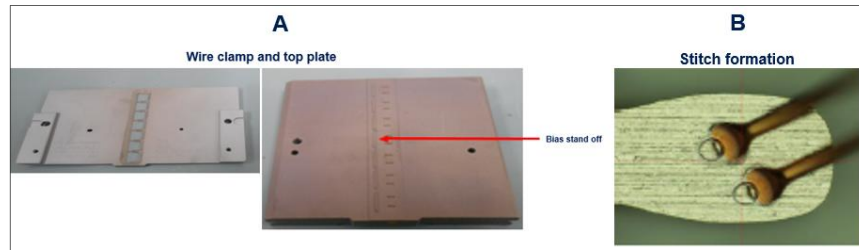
A) New wire clamp and top plate design, B) Actual stitch formation
